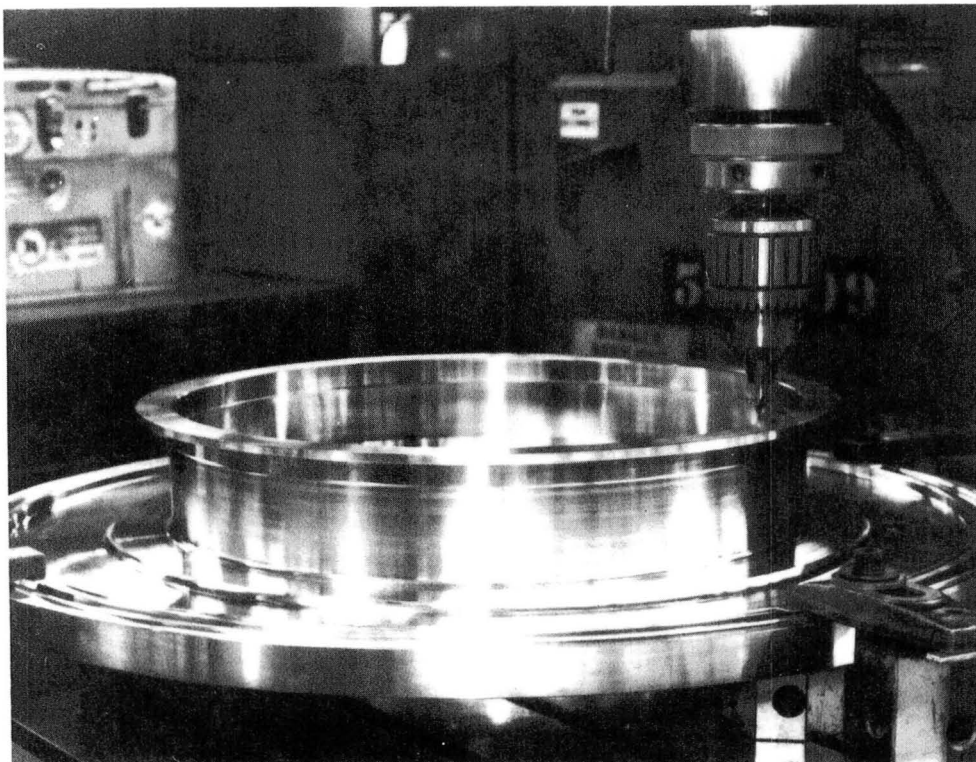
Hole Drilling Operation Being Performed on Disk 160-3
